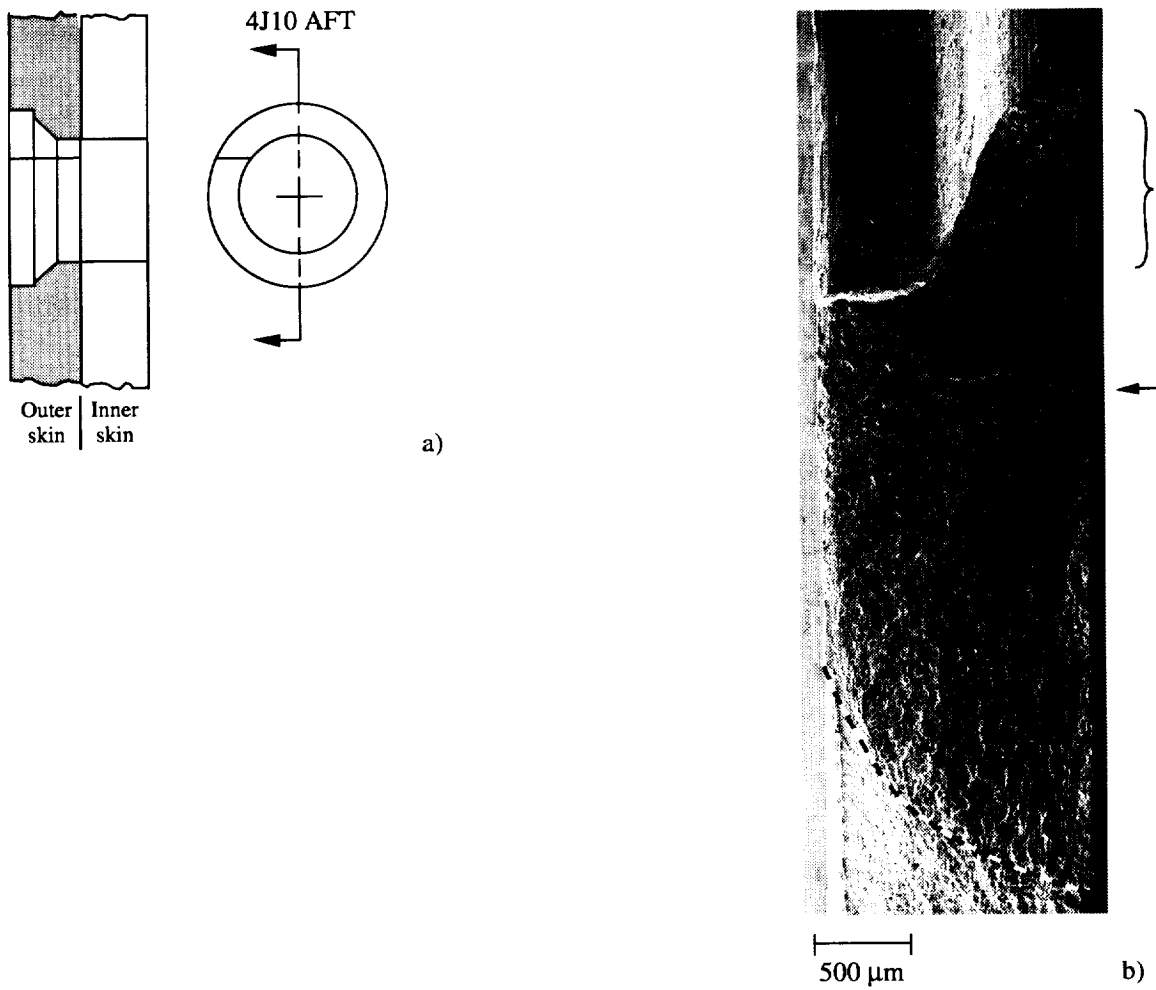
a) The schematic shows the rivet hole 4J10 configuration and the location of the outer skin fatigue crack oriented in the aft direction and about the 10 o'clock position. b) The SEM micrograph shows the fatigue crack fracture surface located at the outer skin rivet hole (top). Crack initiation occurred at multiple sites (bracket and arrow) along the faying surface. The dashed line marks the fatigue crack front.
